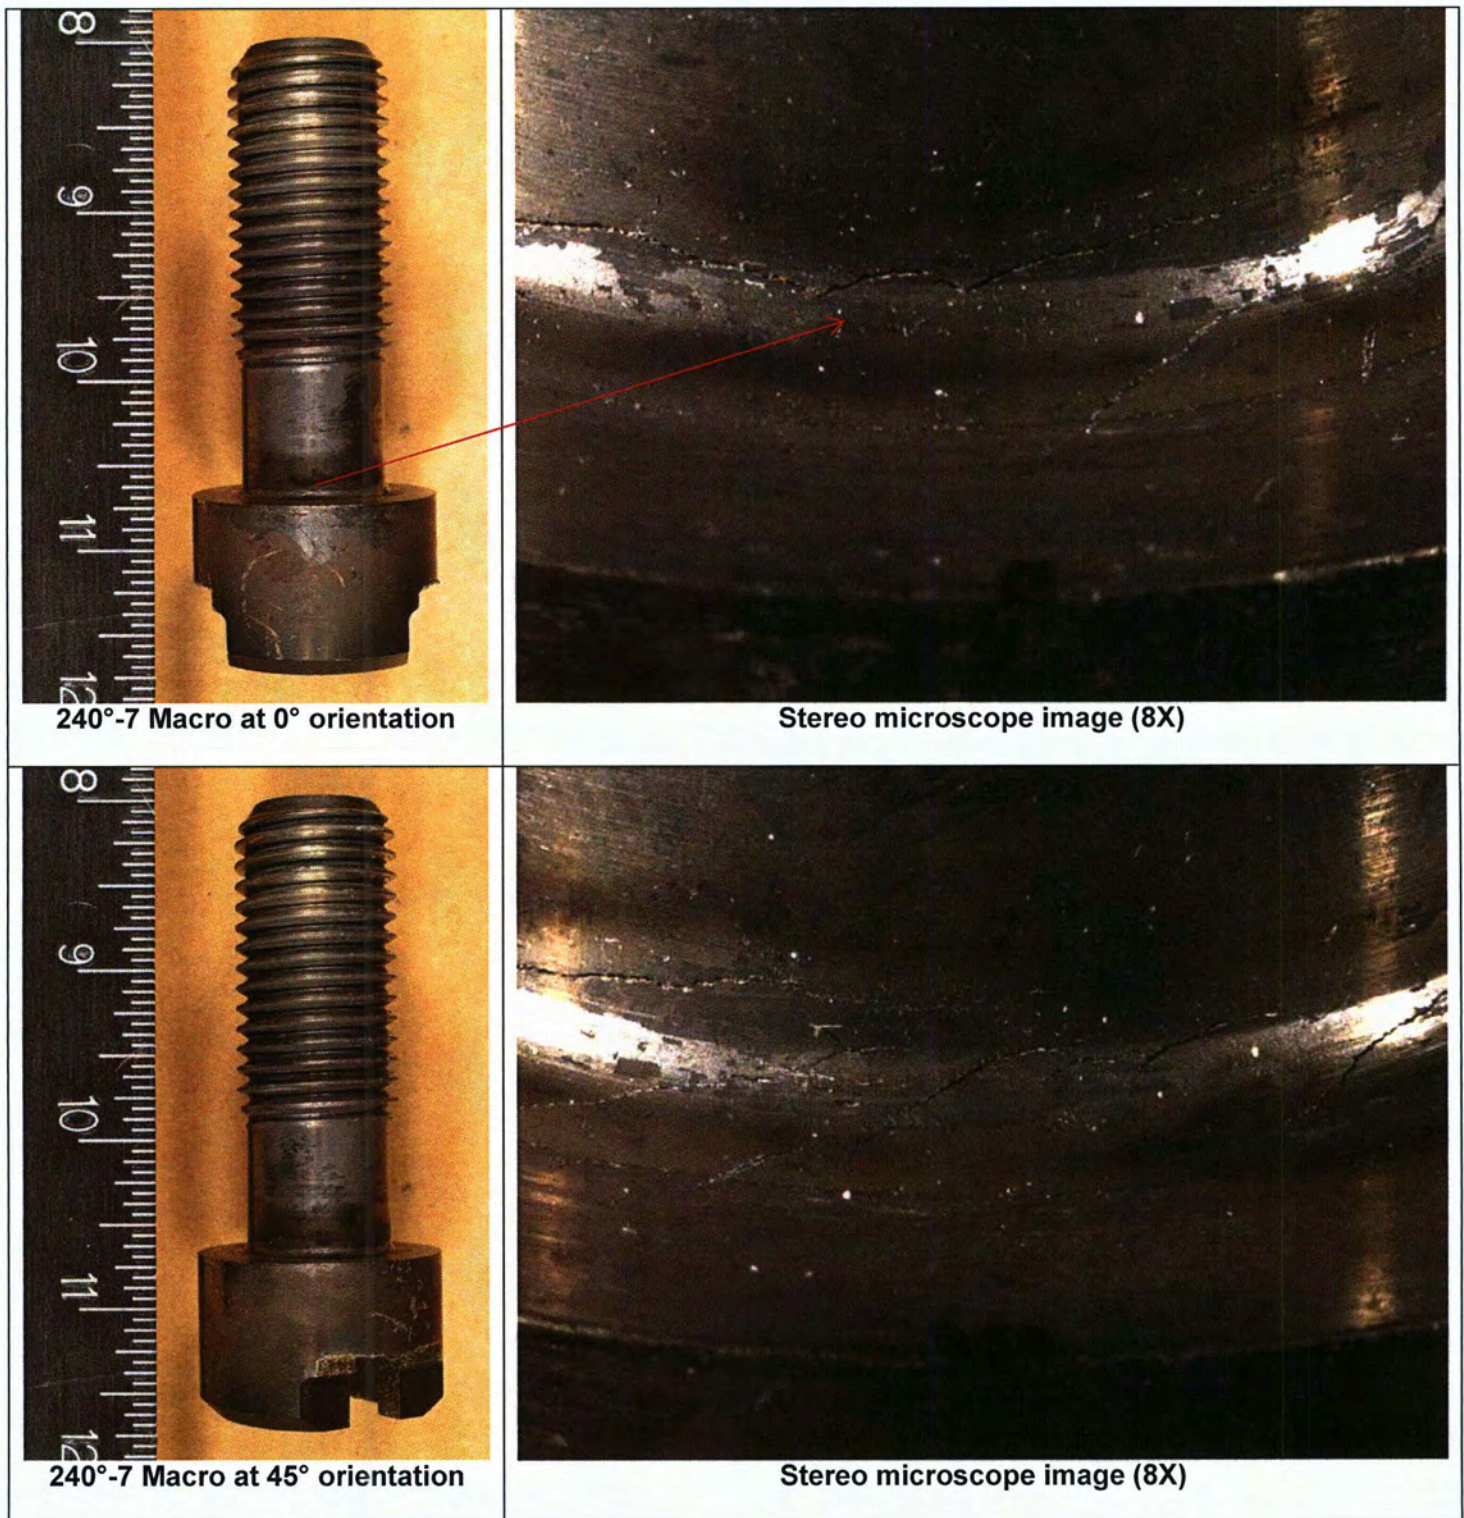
Macro and stereo photographs of bolt 240°-7 taken at 45° increments.
